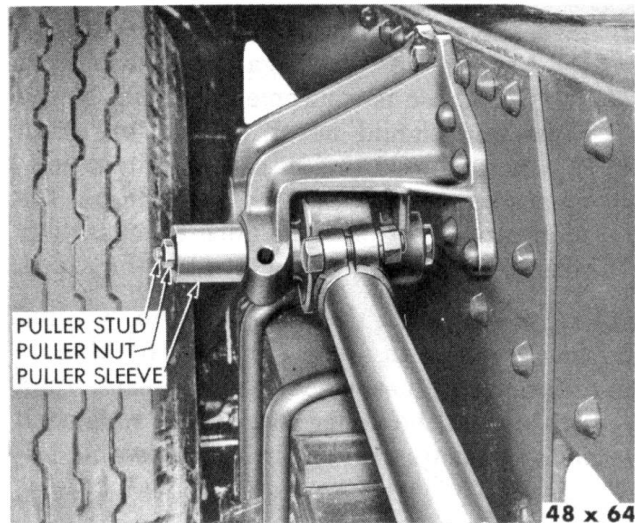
Removing Frame Bracket Upper Torque Rod Pin—Puller DD-1094
